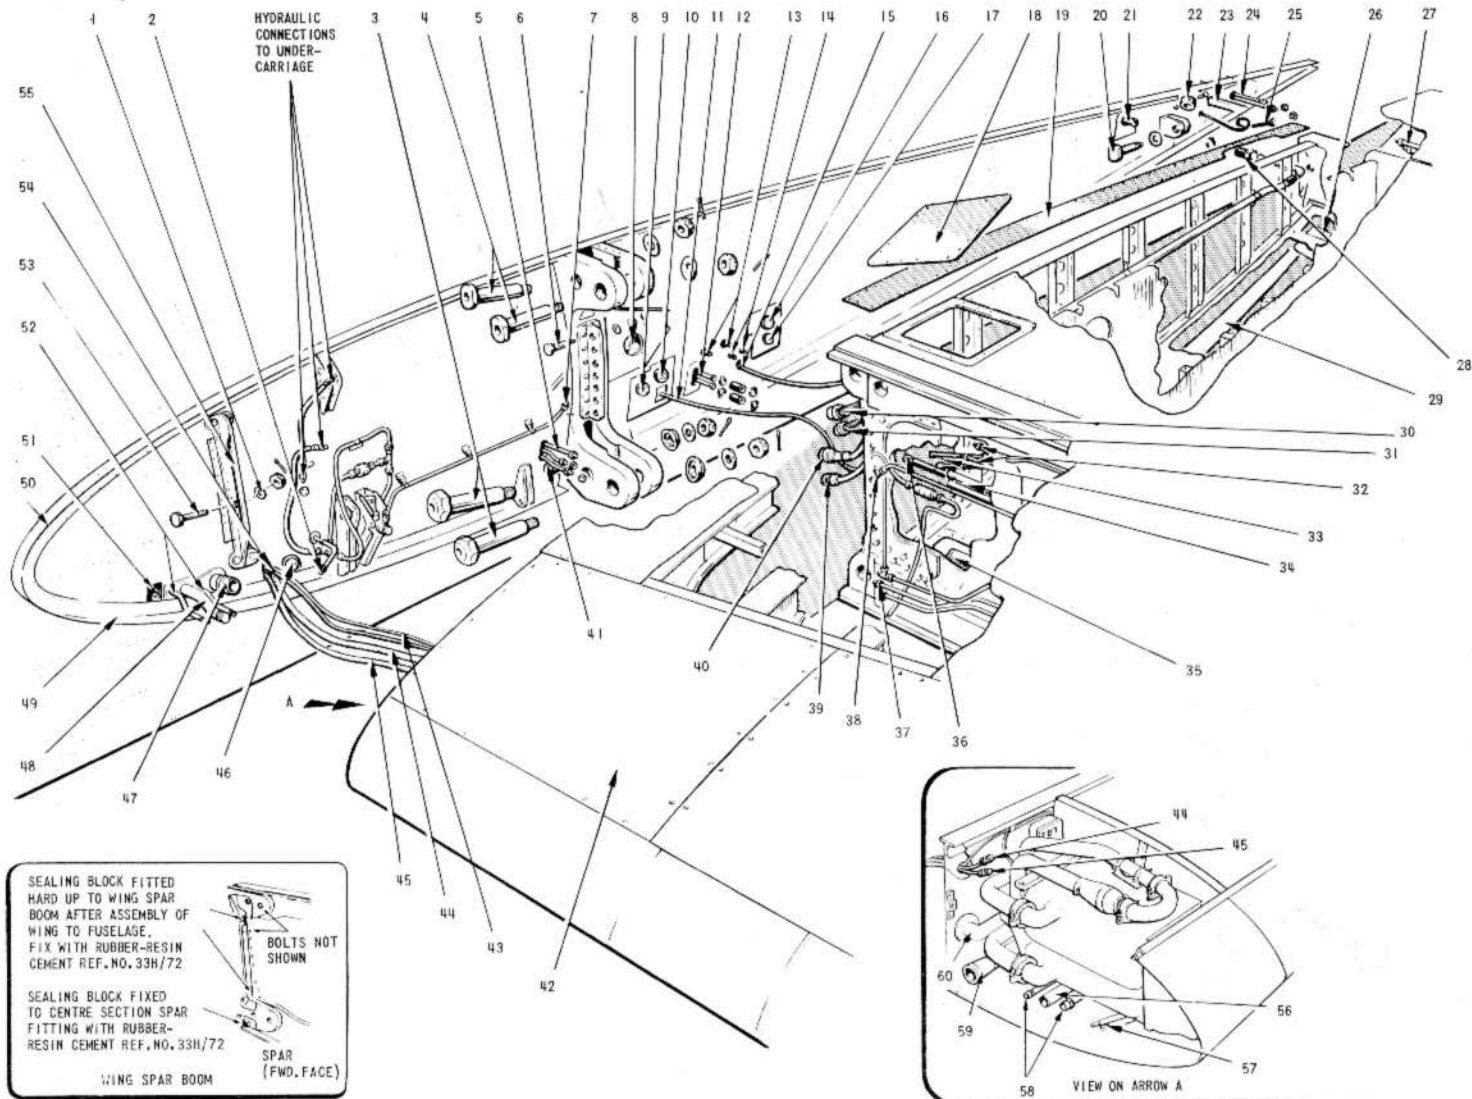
MAIN PLANE - REMOVAL AND ASSEMBLY
